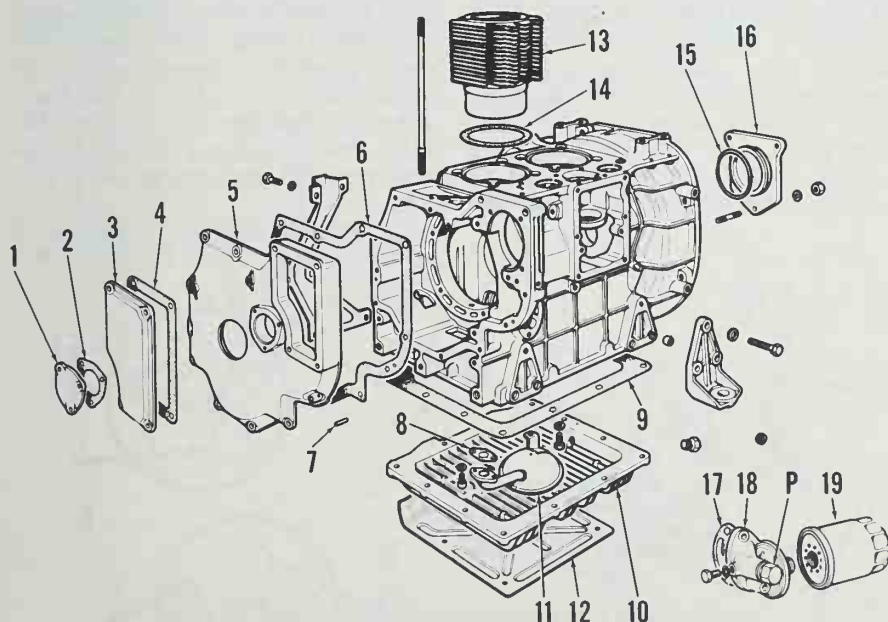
Exploded view of crankcase assembly. Remove plug (P) for access to oil pressure relief valve.
